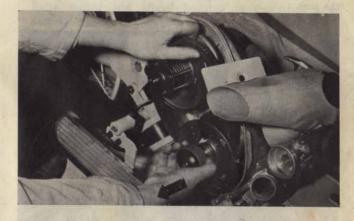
Figure C. — Removing belt by separating driven pulley faces, and turning to right.
